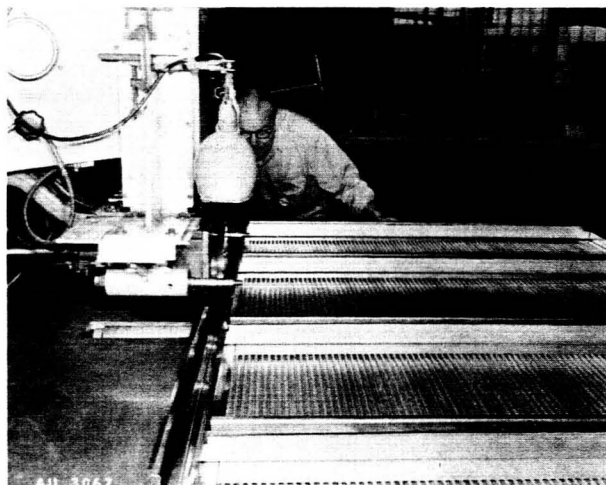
WELDING OF SURFACE ASSEMBLY
